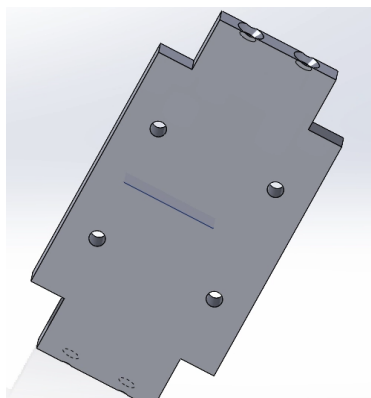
Aluminum actuator mount with threaded holes on face and on side
